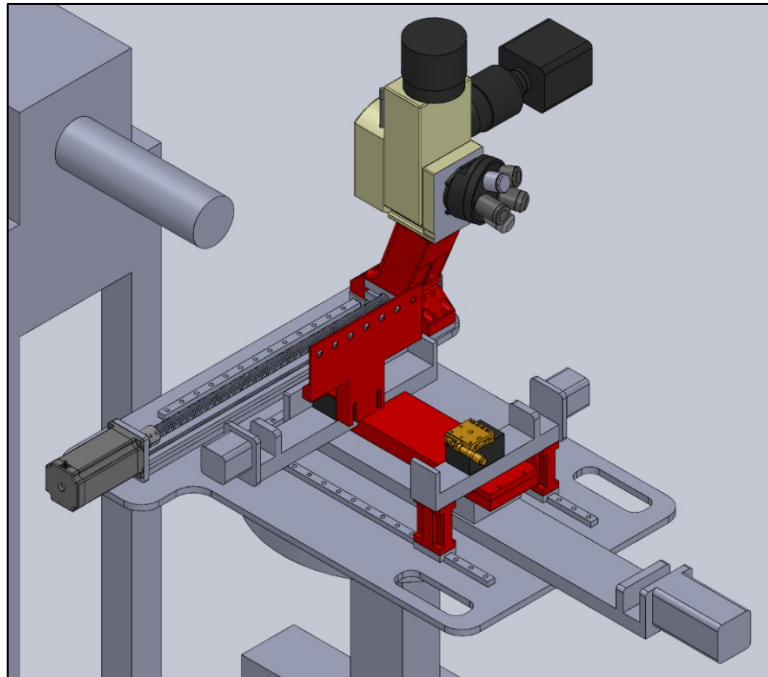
Pinhole Frame, Horizontal PCB Linear Motion Rail, and Optical Axis Manual Adjuster.
